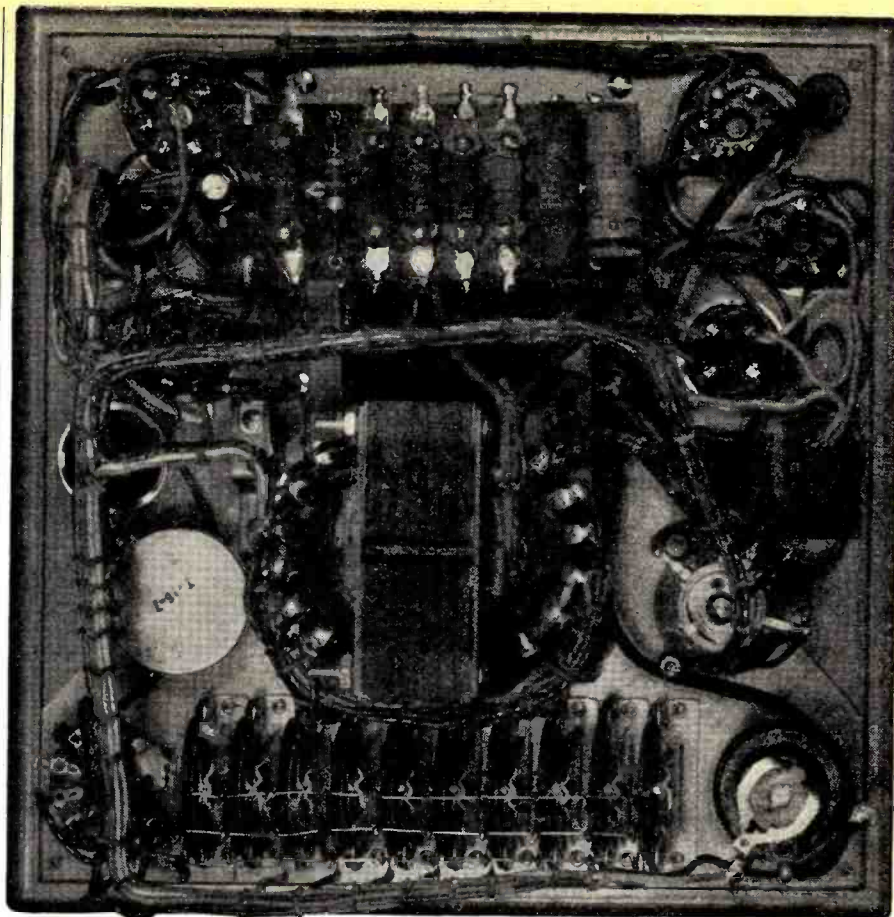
Internal wiring and placement of component parts of the tube tester.
